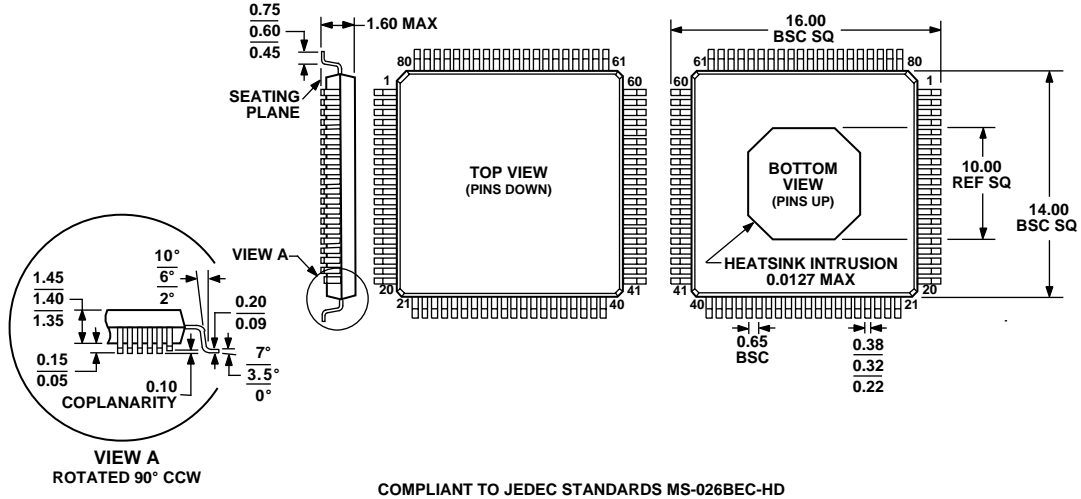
80-Lead Low Profile Quad Flat Package, with Heatsink [LQFP_ED] (SQ-80-2)
